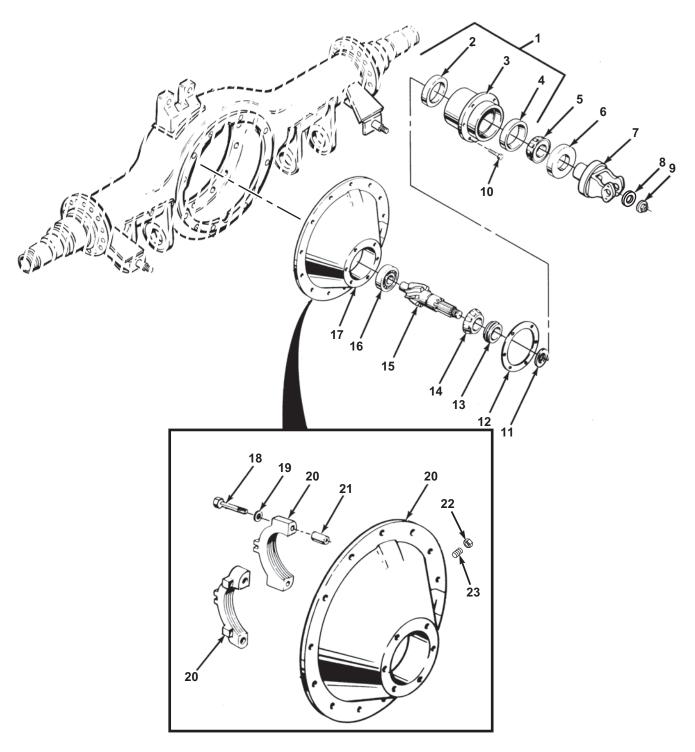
NO. 4 AXLE CARRIER (Sheet 1 of 2)
